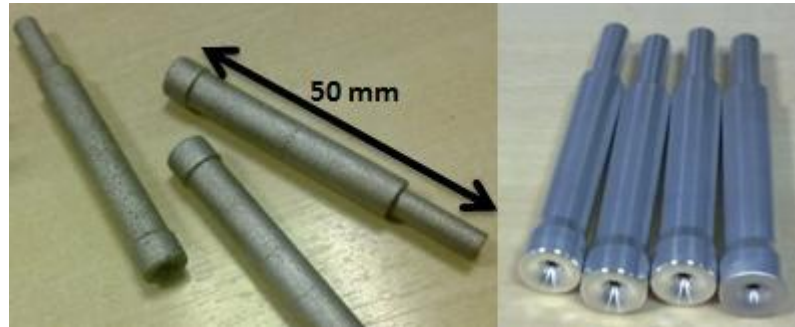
2 Fill tubes produced by SLM (left) and a conventional machining method
